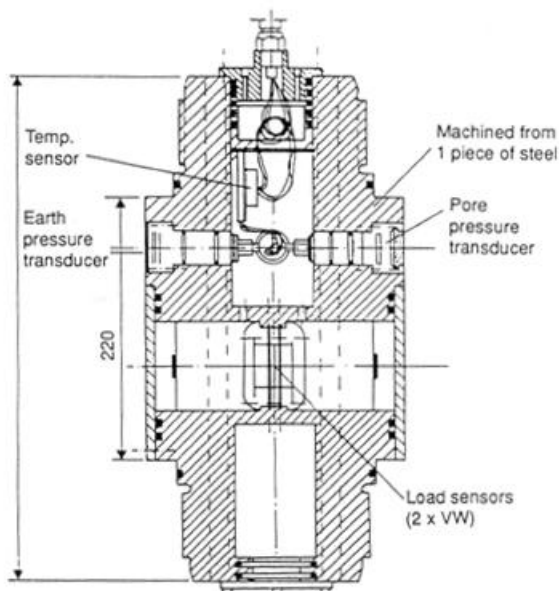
Special instrumentation unit used on type test piles A1 to A4 and C1, Onsøy
